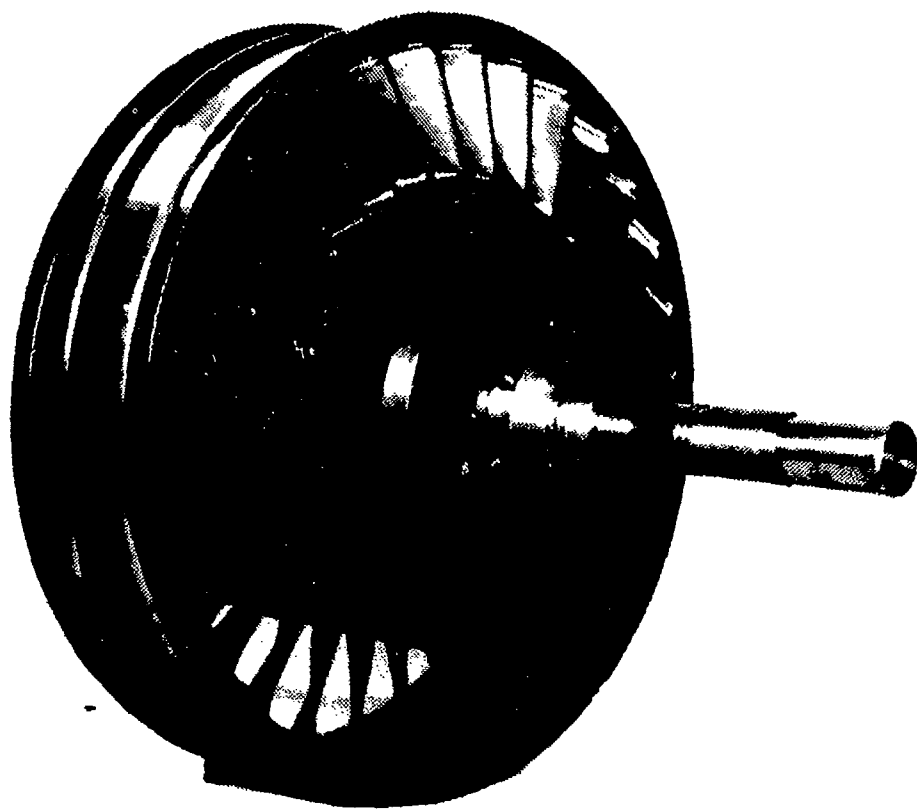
9 INCH DIAMETER ROTOR VIEWED FROM THE REAR
